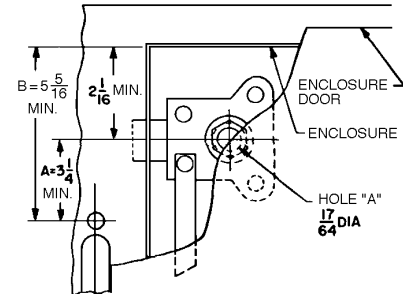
Positioning Roller Latch, B ≥ 5-5/16"
